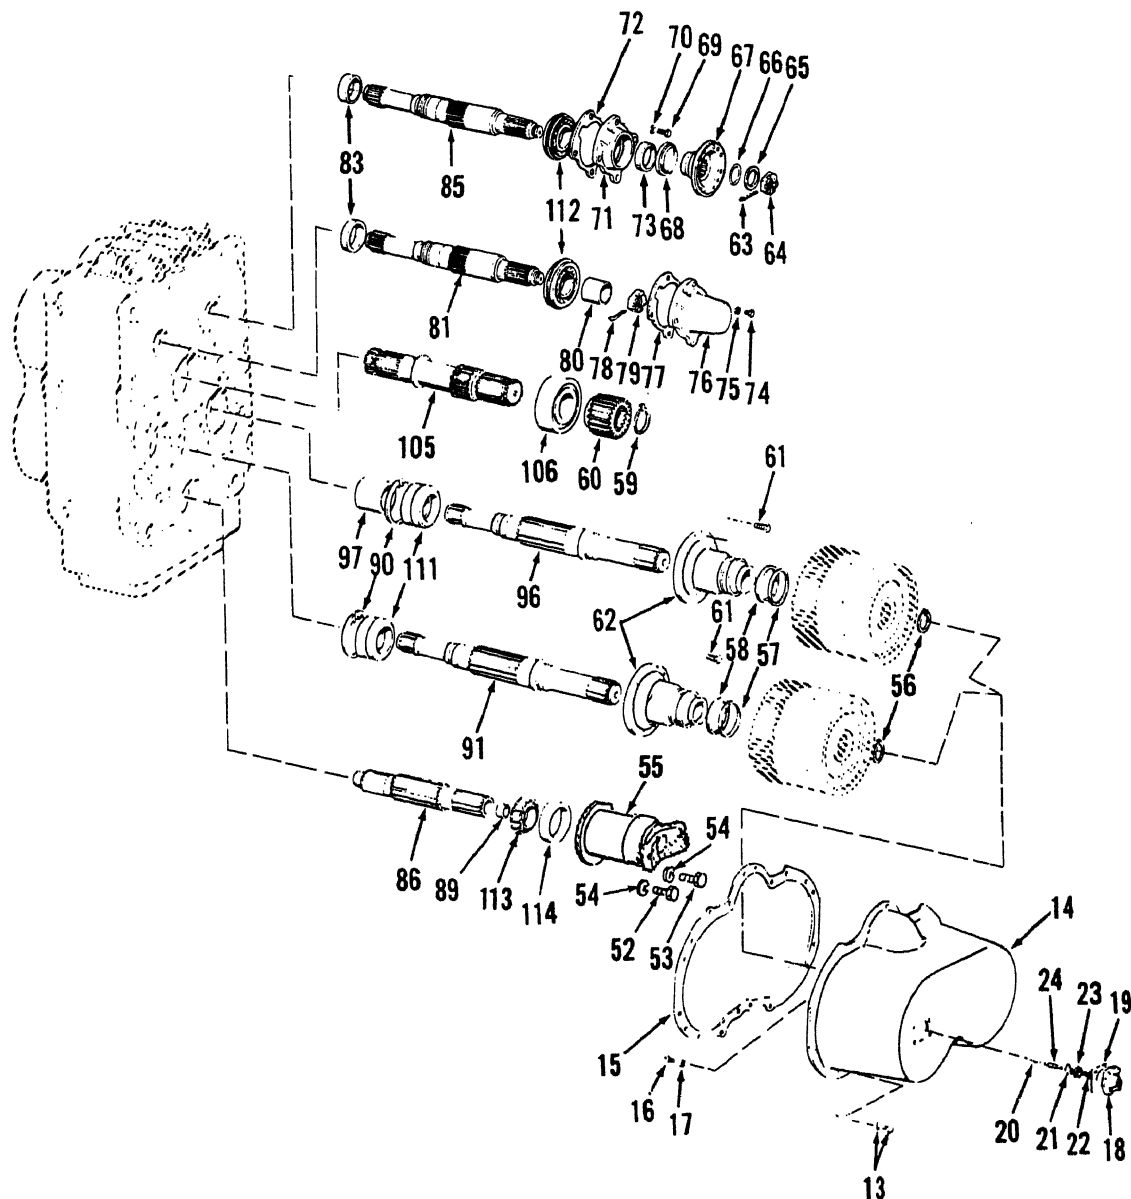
Transmission assembly—exploded view (sheet 1 of 2).
